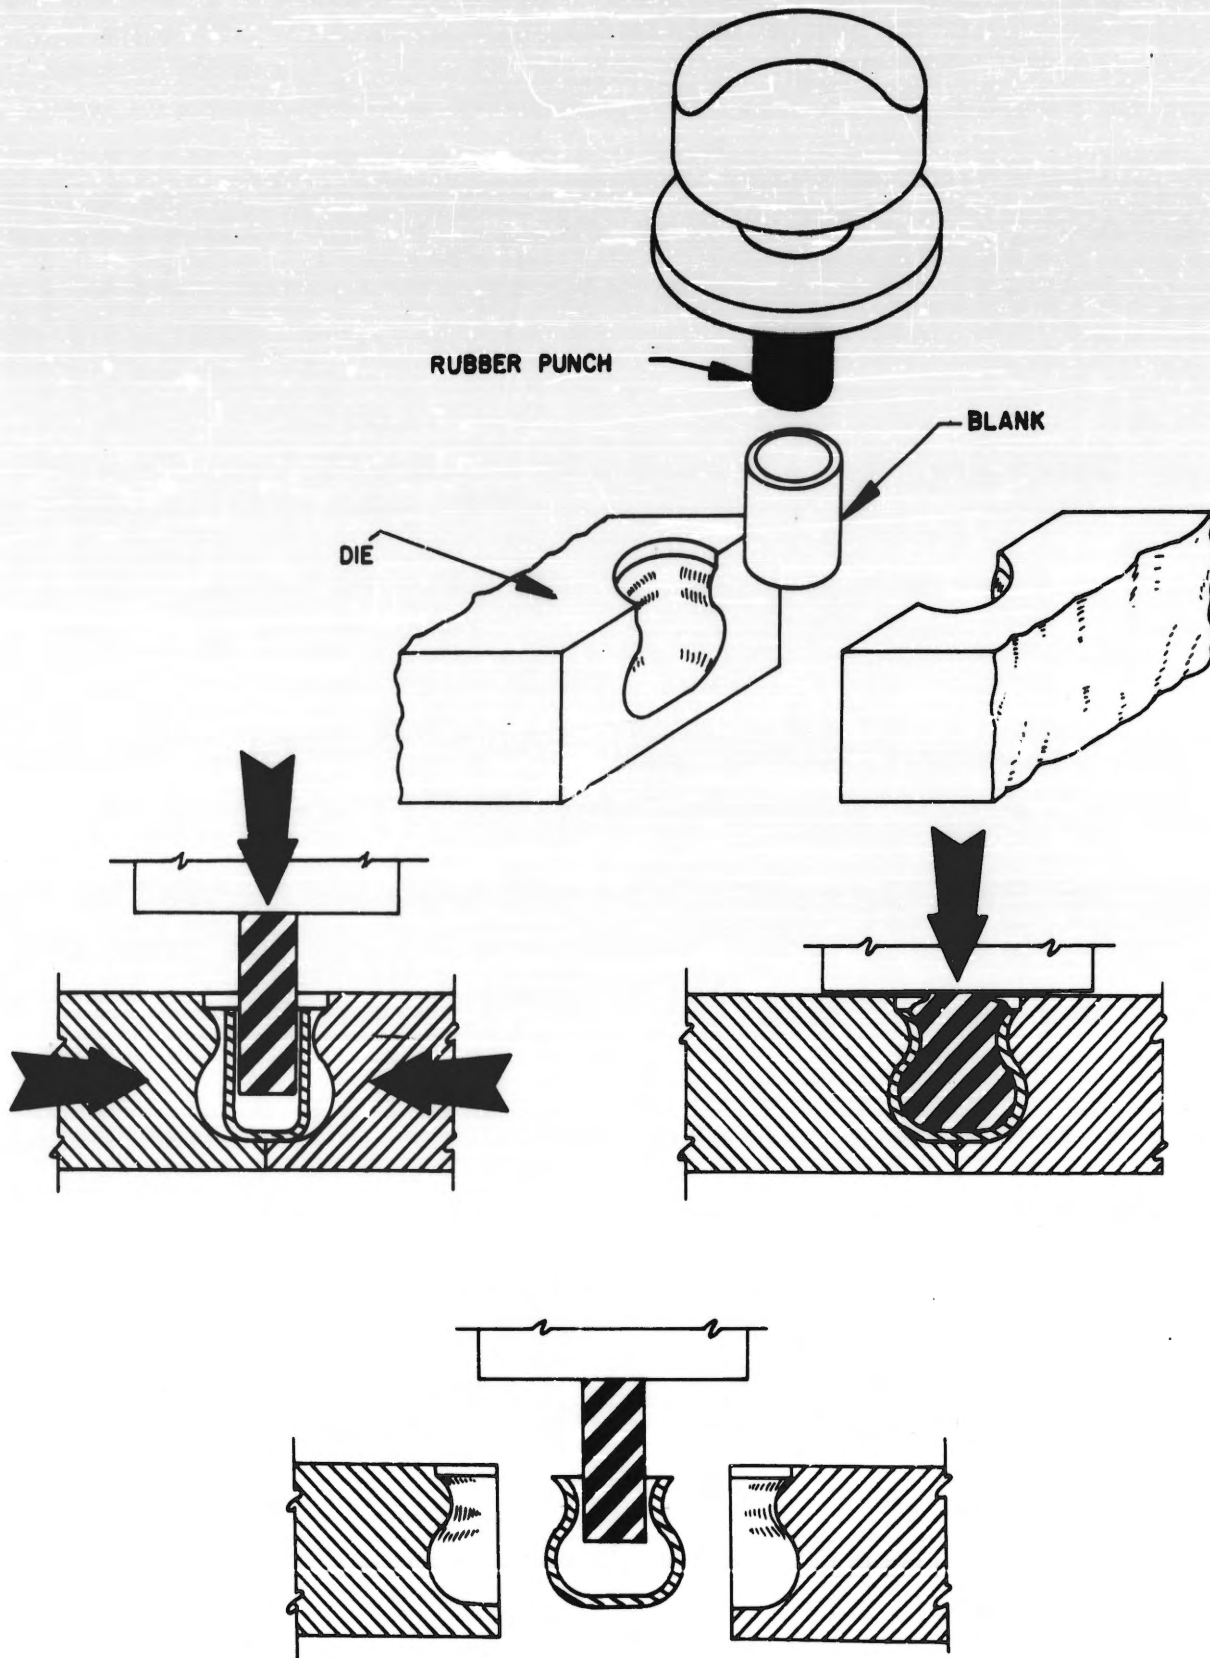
A Typical Bulging Operation Using Rubber Punch
